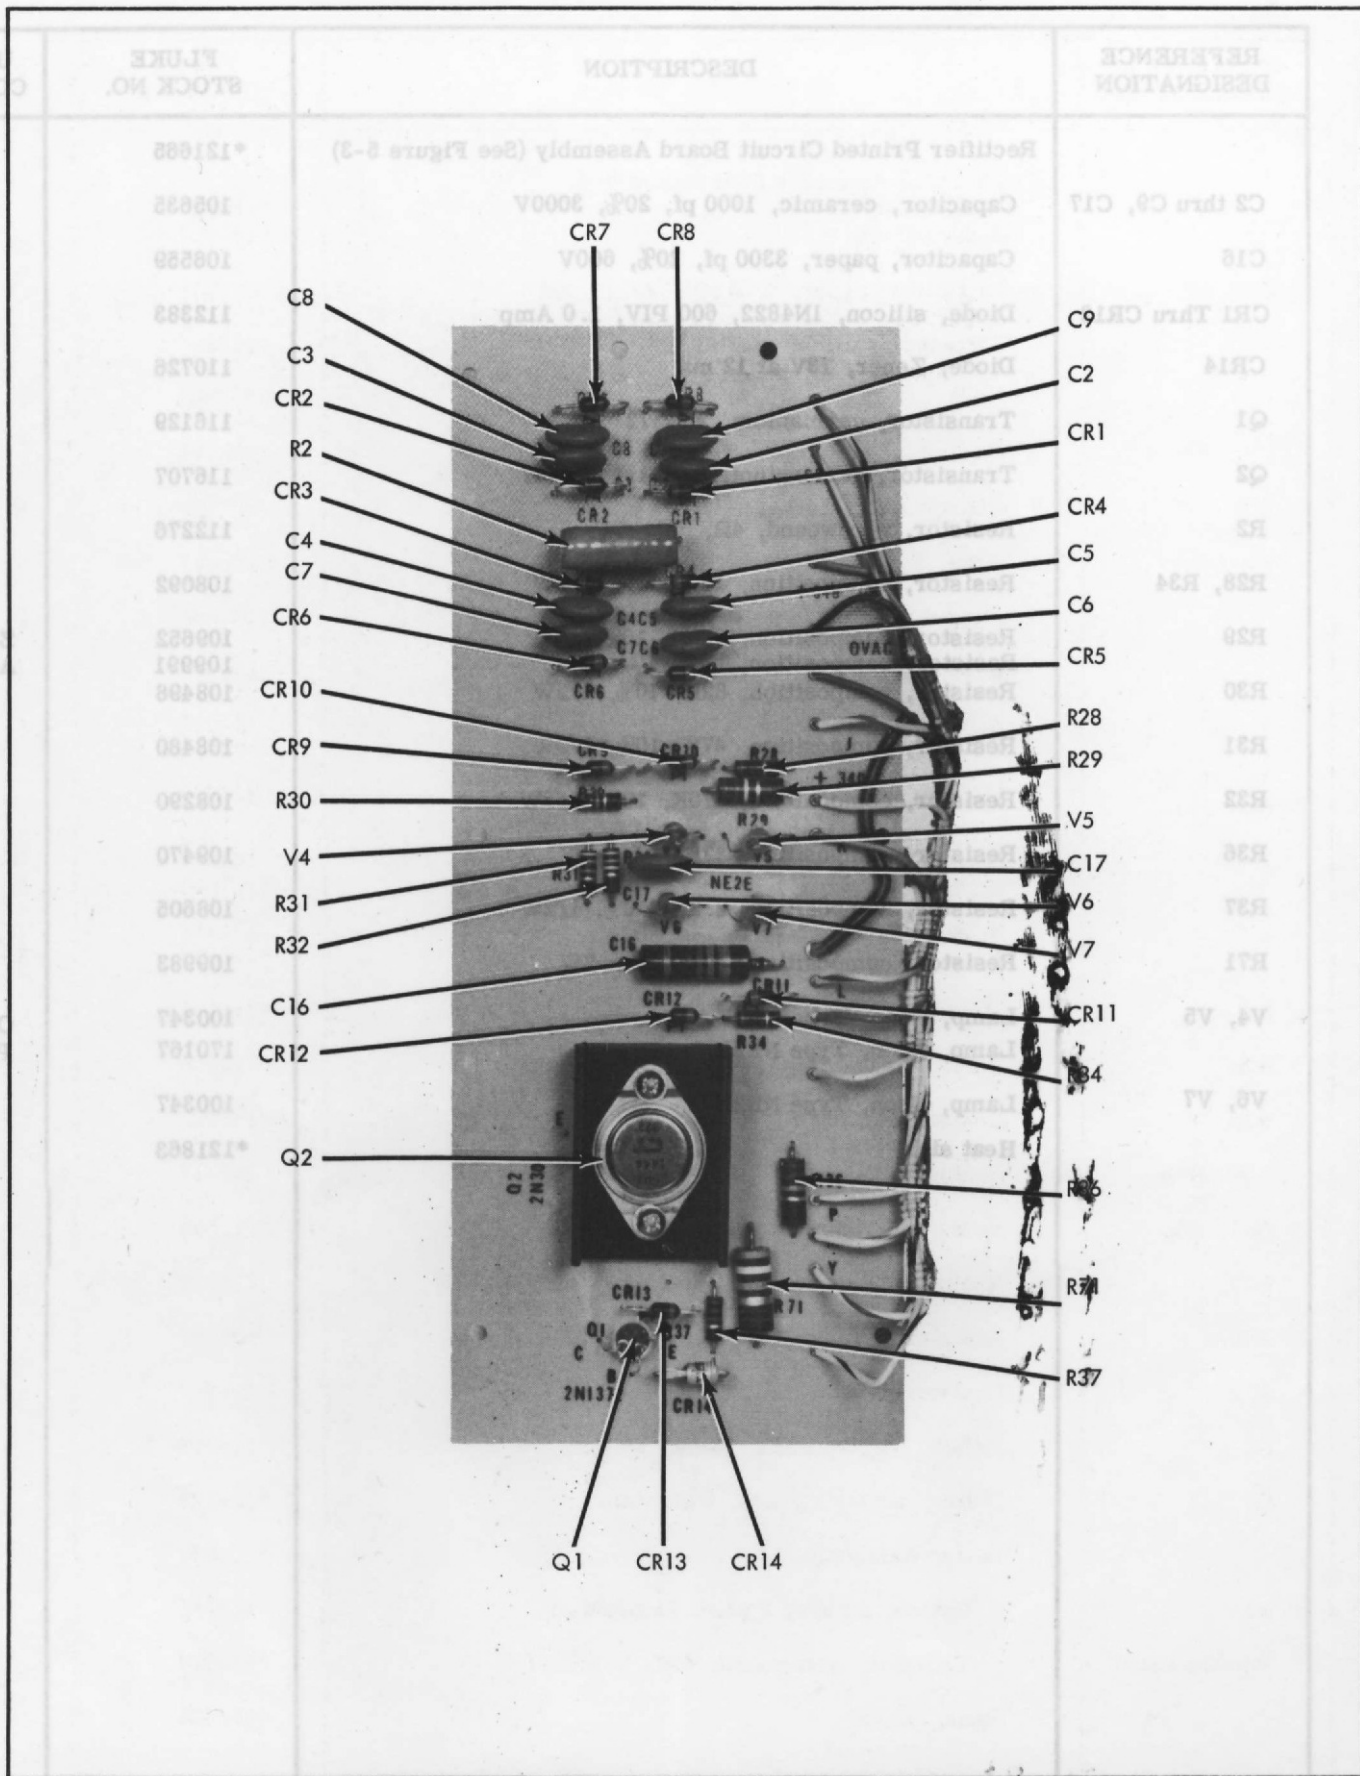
RECTIFIER PRINTED CIRCUIT BOARD ASSEMBLY
